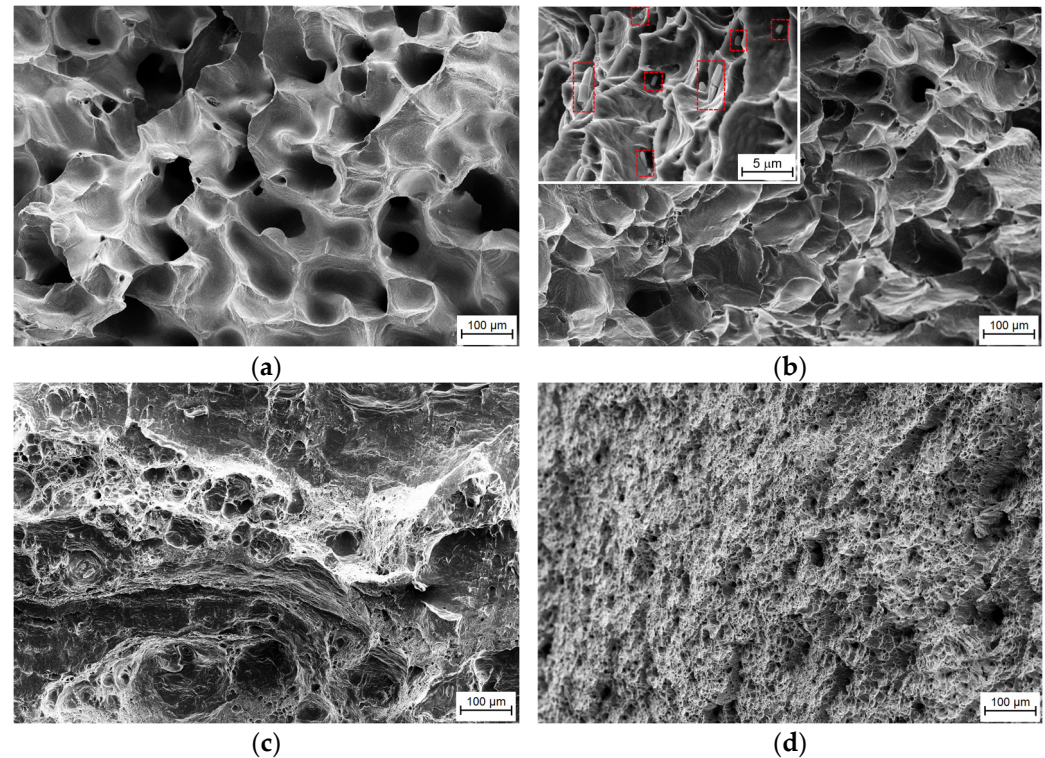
Topography of the fracture surfaces of the samples obtained by all methods: (a) BJ; (b) SC (inset shows higher magnification with the oxide particles marked by red frames); (c) DMLS; (d) SM.
